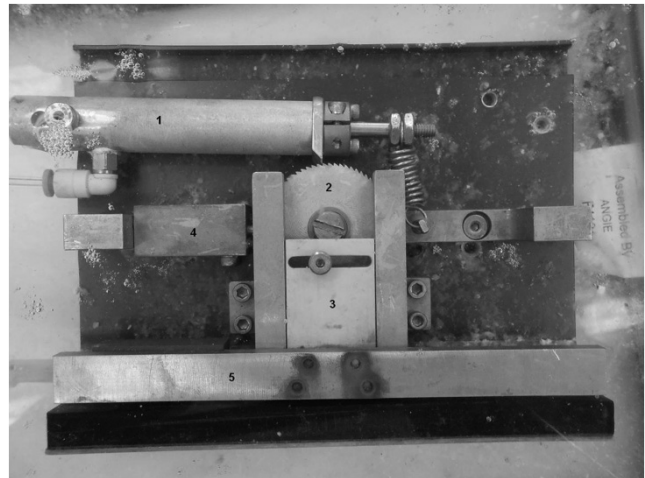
Magnet assembly with "alpha" shunt movement design. The components include; 1 - air cylinder, 2 - Ratchet gear, 3 - Guide for shunt movement, 4 - Ratchet lock assembly, 5 - Shunt.
